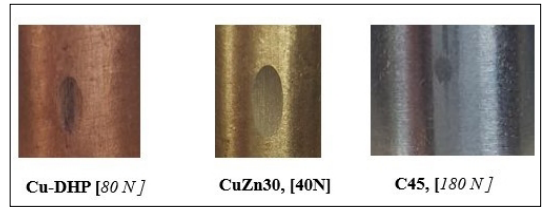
Abrasions on the surfaces of Cu, CuZn, C45 test pieces.
